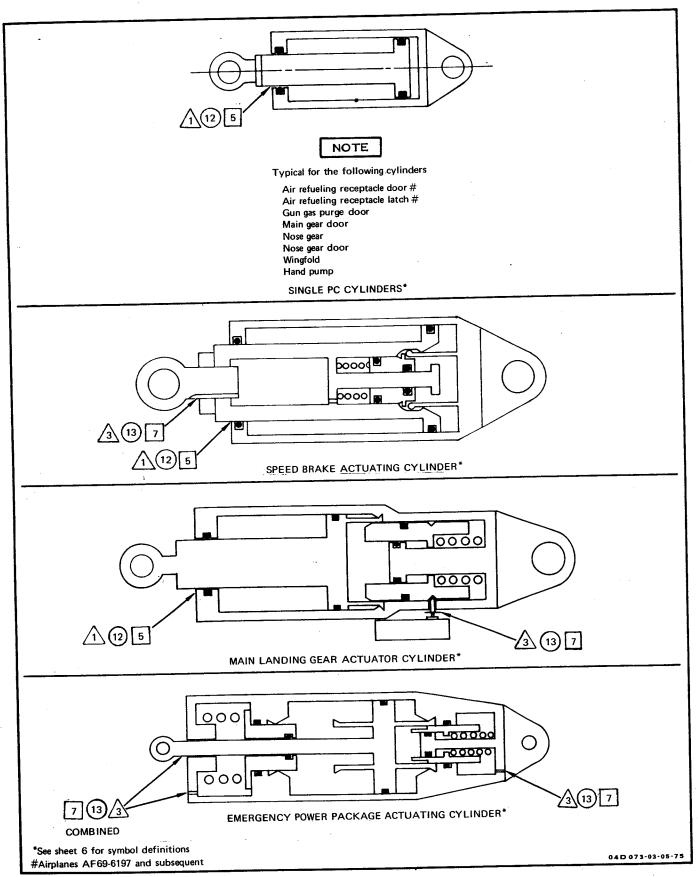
Hydraulic Component Allowable Leakage (Sheet 3)
